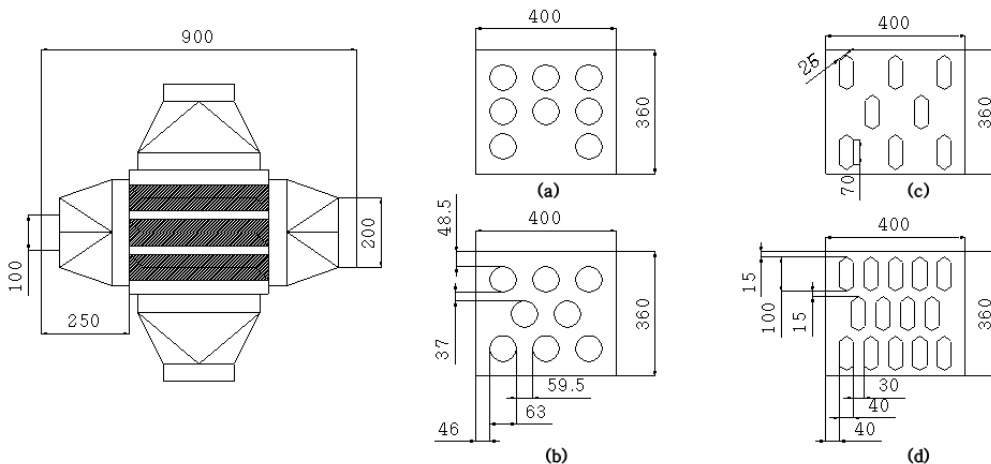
Design sheet of the heat exchanger for primary test(unit : mm).
